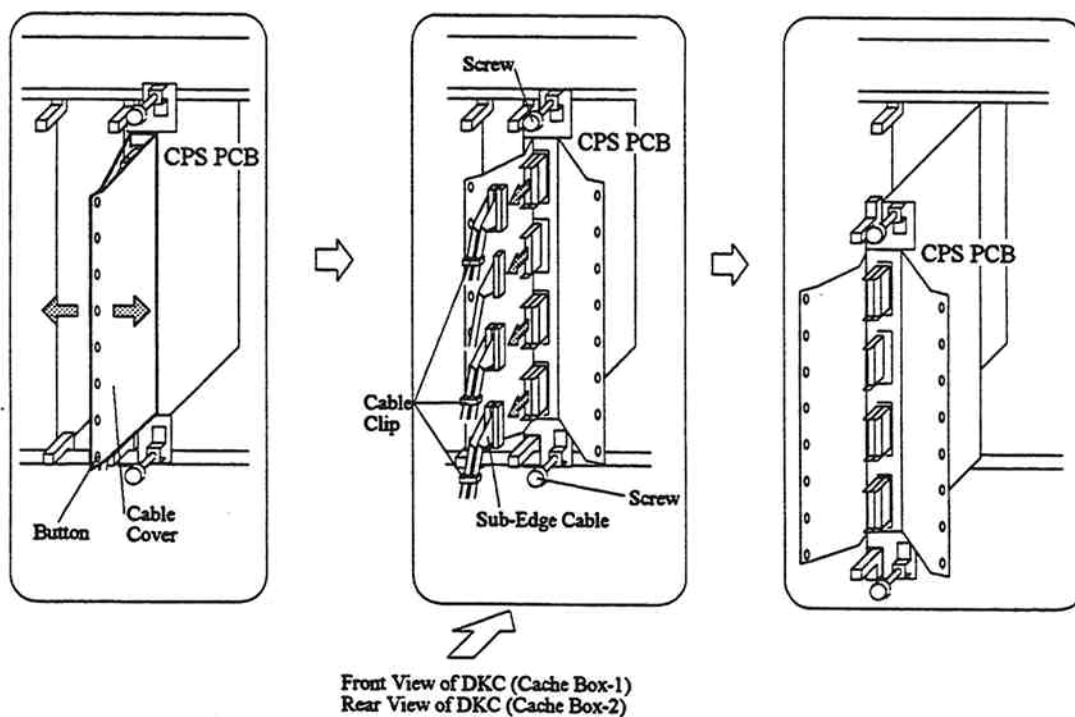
Removal of the CPS PCB
